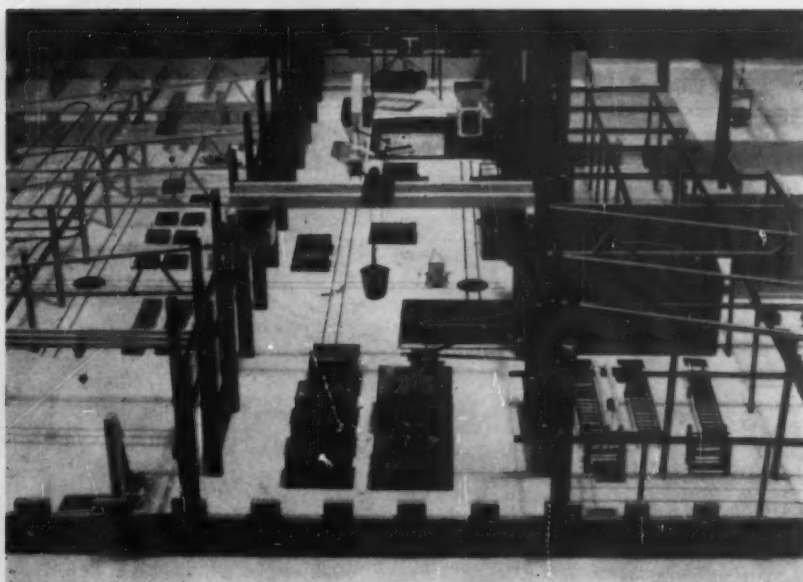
Utilities, handling equipment must be considered when undertaking any changes in the layout of the plant.
